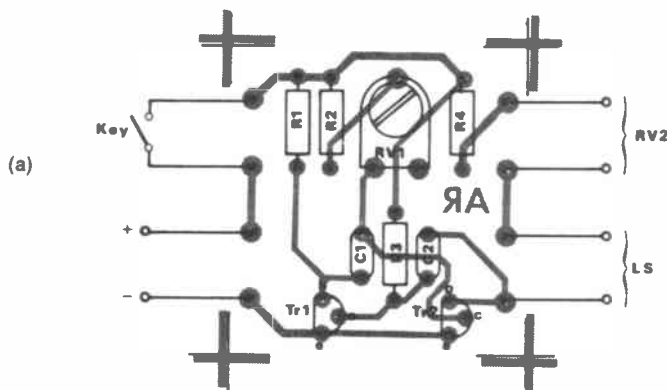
The component overlay for the PCB. The emitters of Tr1 and Tr2 are shown and fit towards the bottom of the board.
